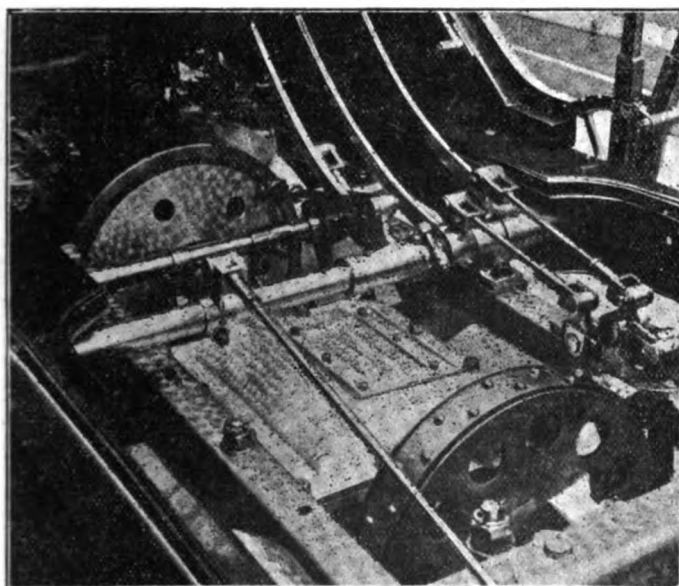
View of Clutch, Gear-box and Footbrake of Roydale 18-22-h.p. Car.
